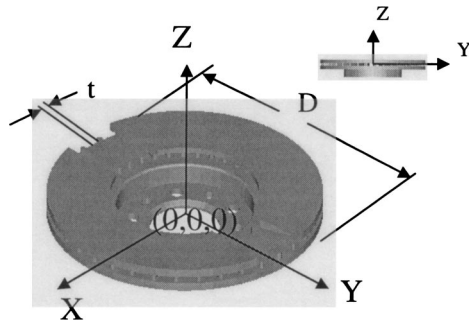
Vented rotor showing sections removed for internal PIV measurements
